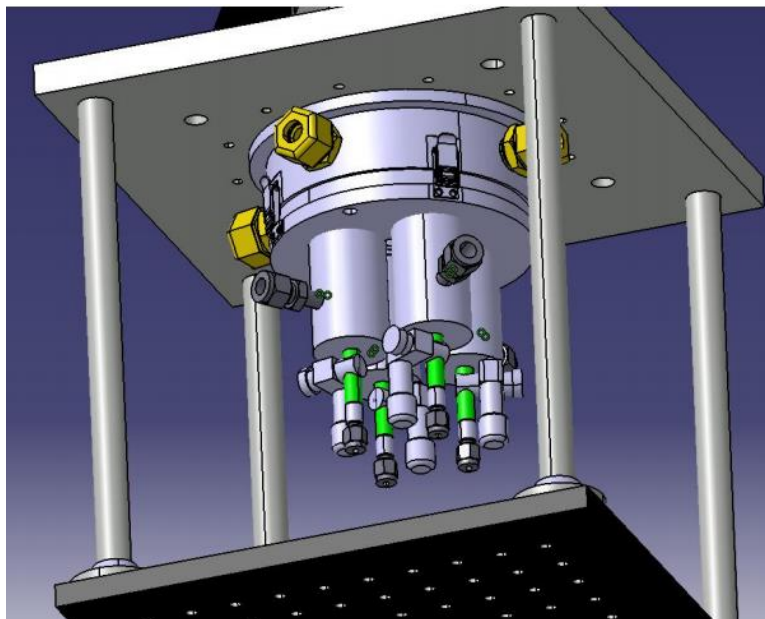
Bottom view of 4 element LDI. A new clamp plate and base plate would be needed in addition to three additional burner setups: venturi, fuel injector, swirler, burner housing.
